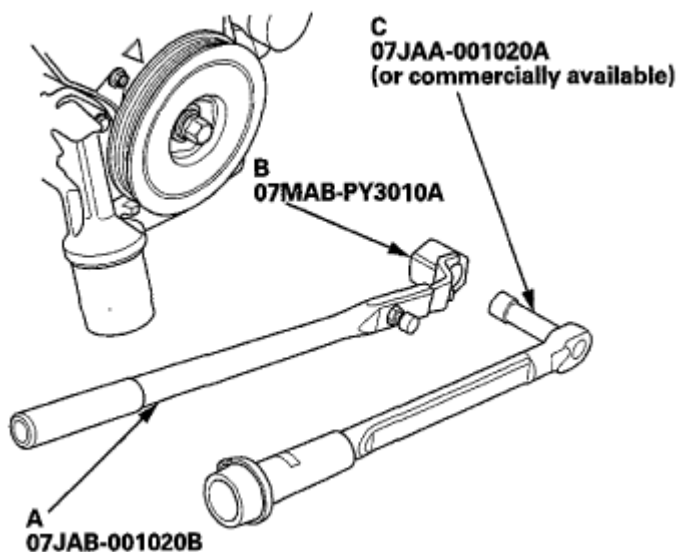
Tightening Pulley Bolt Using Heavy Duty Socket
